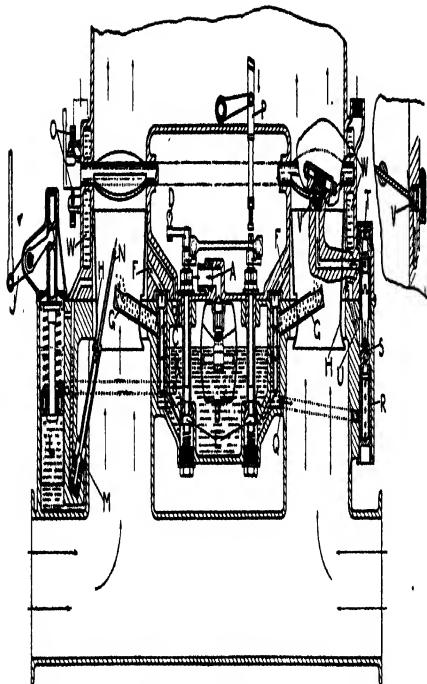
Diagrammatic Section of Carburetors—Supercharged Engines.
